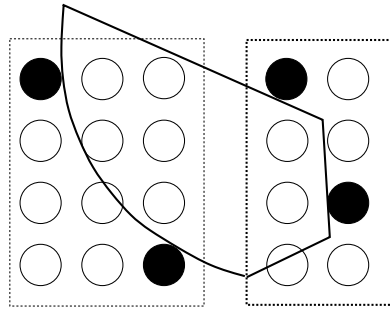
The two-dimensional view of the workpiece and the fixture vise in Figure 1.
